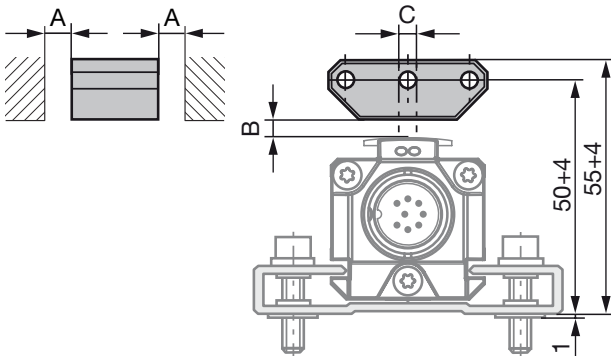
Dimensions and distances with BTL5-P-3800-2 magnet
